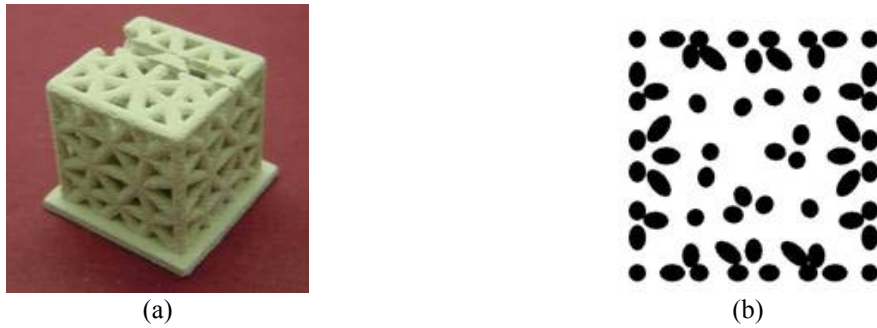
Cross-section of Trussed Cube; (a) as built, (b) x-y orientation
